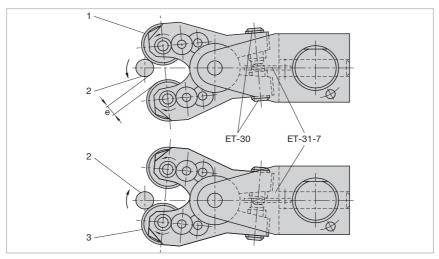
Adjusting the pendulum clearance with a spring steel sheet
